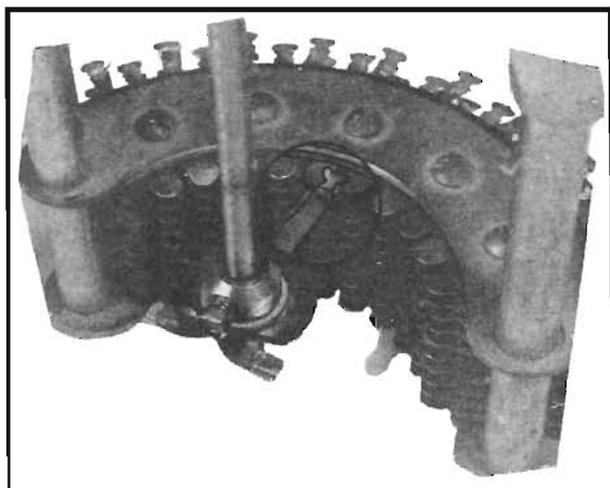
A Wiper Spring Assembly which is Bridging Between Bank Contacts 5 and 6, Level O.
